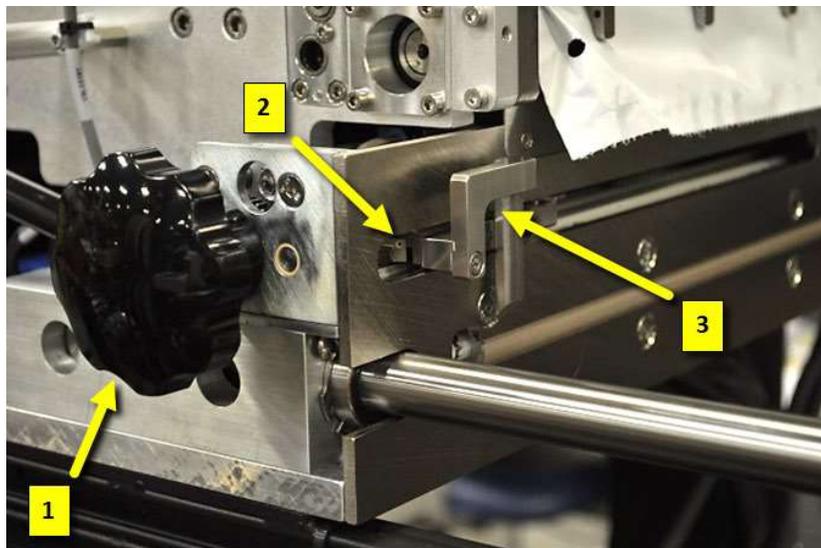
HAND CRANK AND SEAL FLATTENER PINS (PICTURED WITHOUT SIDE GUARDS)
